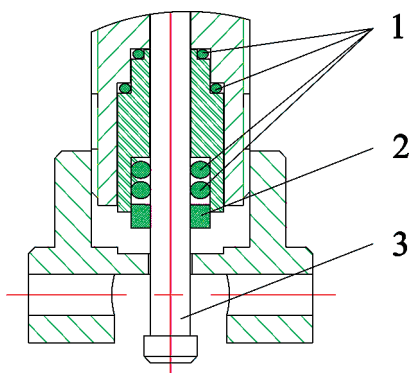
Pressurized structure of the piston shaft: 1, fluorine rubber ring; 2, polyimide ring; 3, piston shaft.
